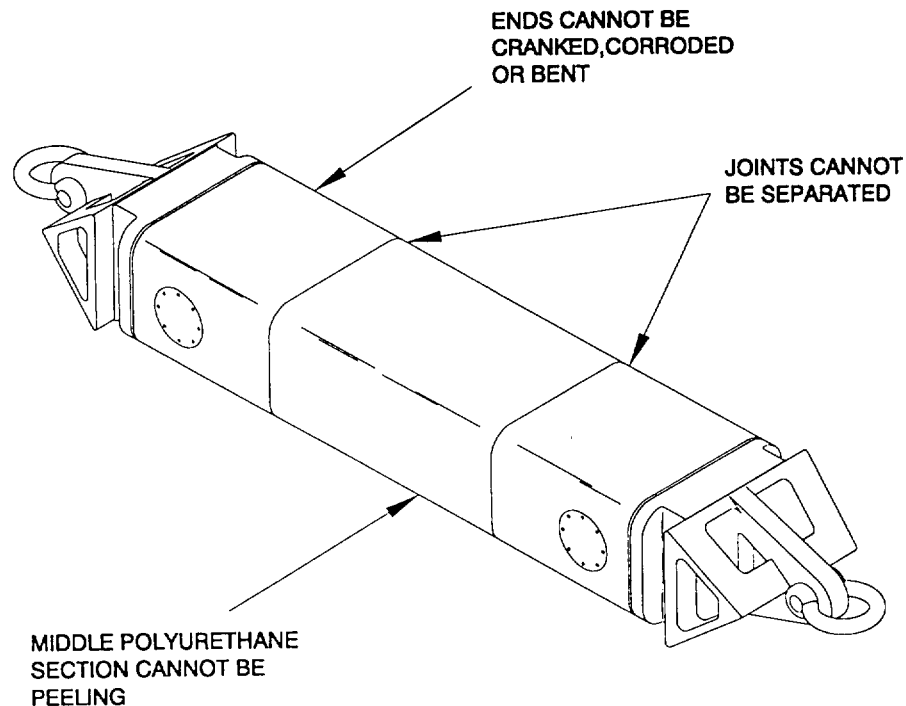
Flexor, Pontoon Assemblies, Inspect.
